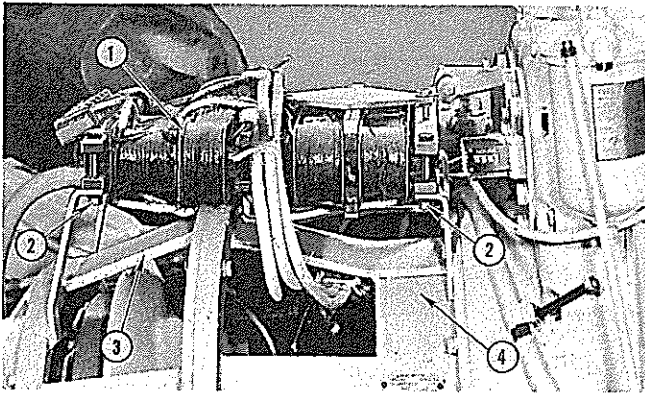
A.C. GENERATOR AND TRANSFORMER
